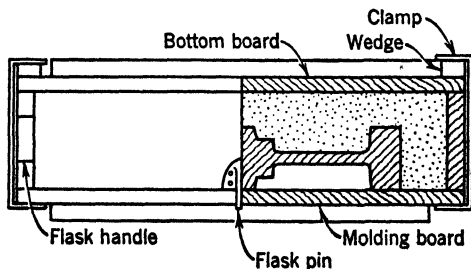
B. Side view of sectioned mold, illustrating drag in clamped position for rolling-over.
